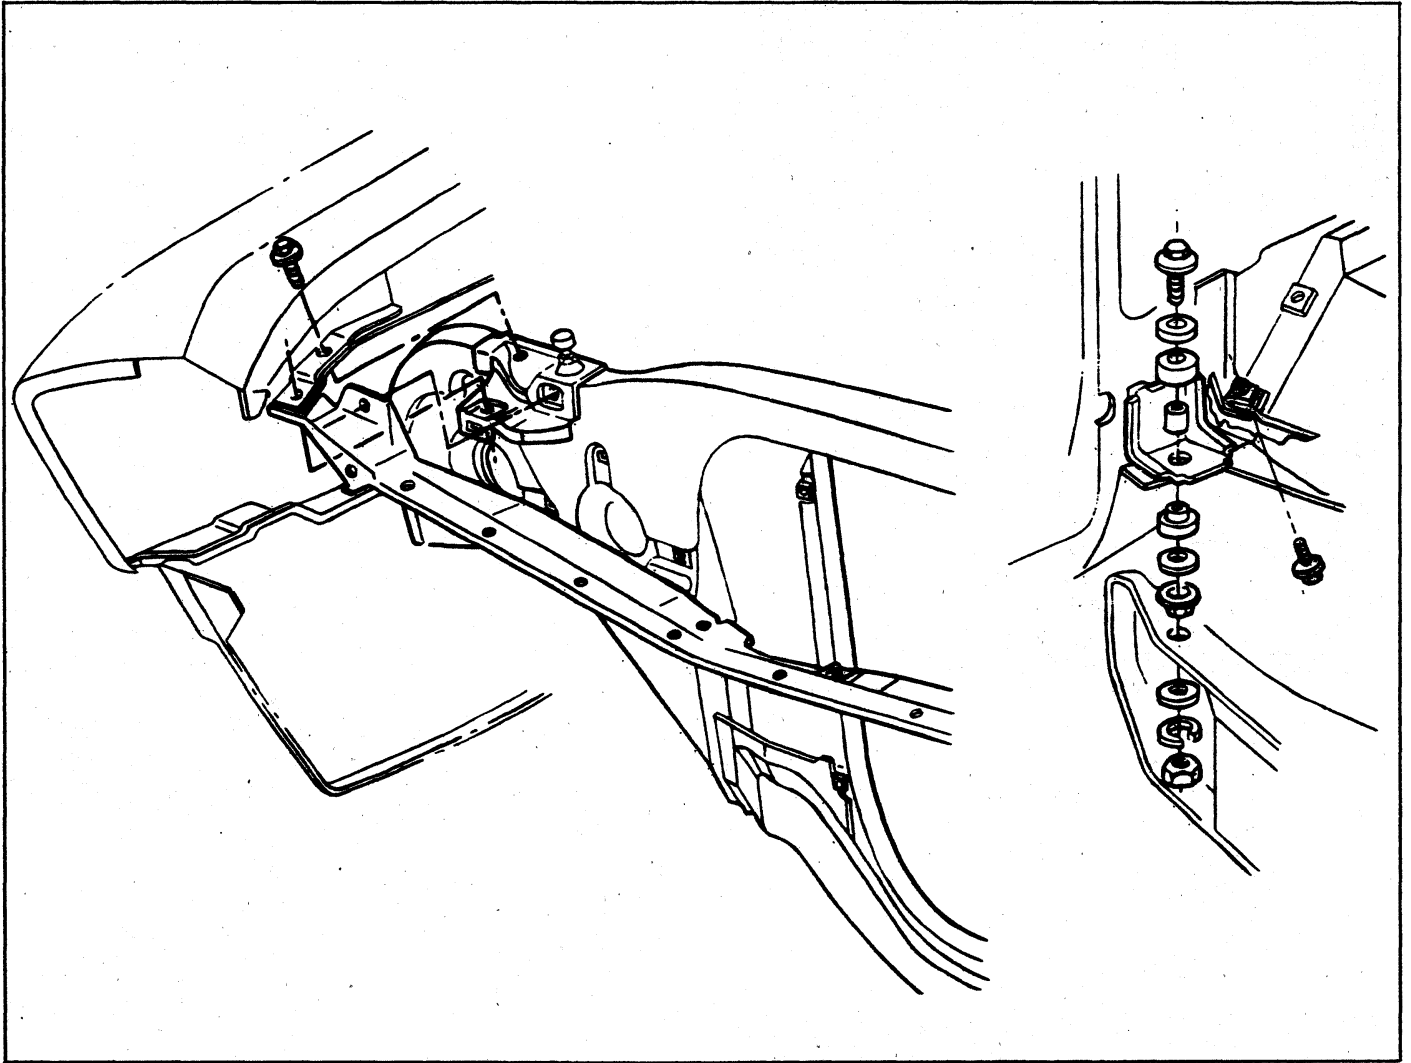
Chevelle Radiator Support to Frame, Fenders, and Skirts
